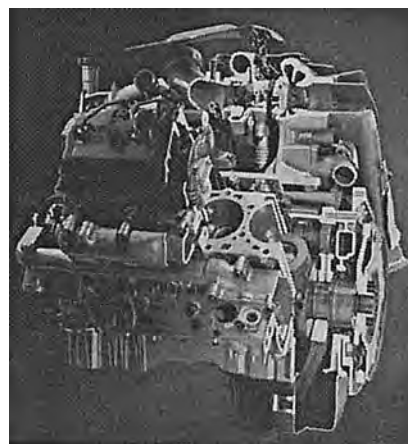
GM Duramax medium-duty four-stroke diesel engine with bowl-in-piston combustion chamber, direct fuel injection, and turbocharging. (Courtesy of GM.)
